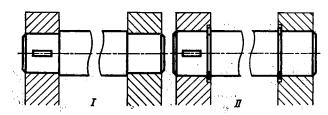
Pivot pins fixed against axial and angular displacements between detachable supports
